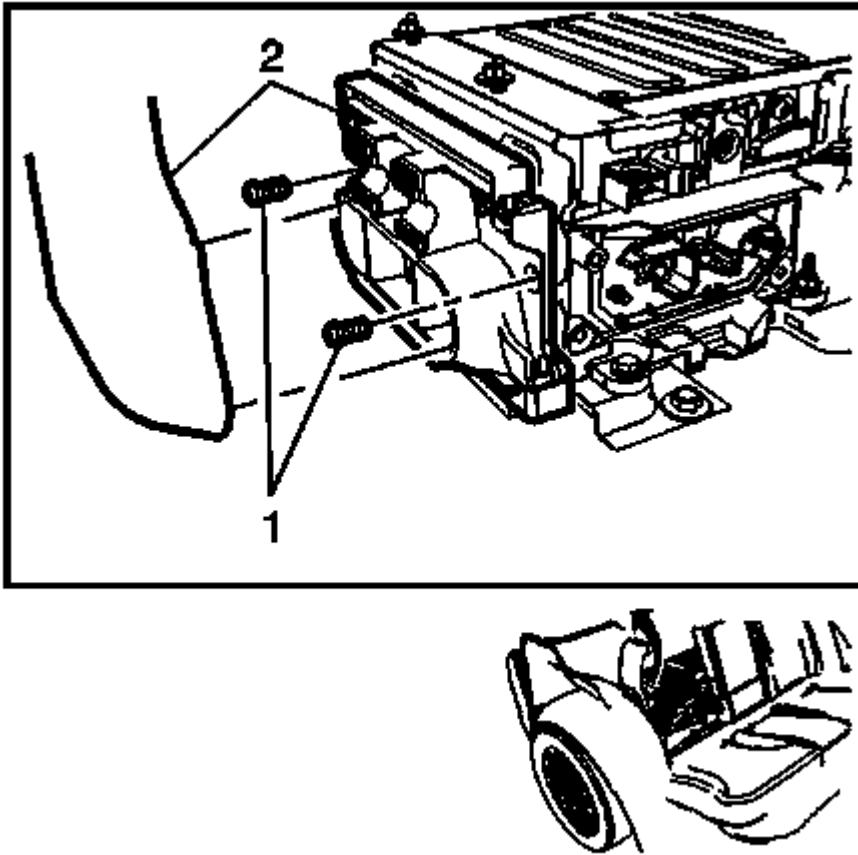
Drive Motor Battery Cooling Blower Outlet Duct Fastener
